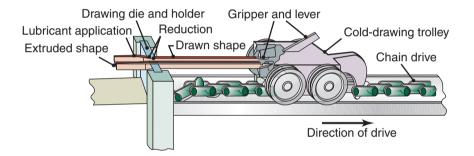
Cold drawing of an extruded channel on a draw bench to reduce its cross section. Individual lengths of straight rods or of cross sections are drawn by this method.
